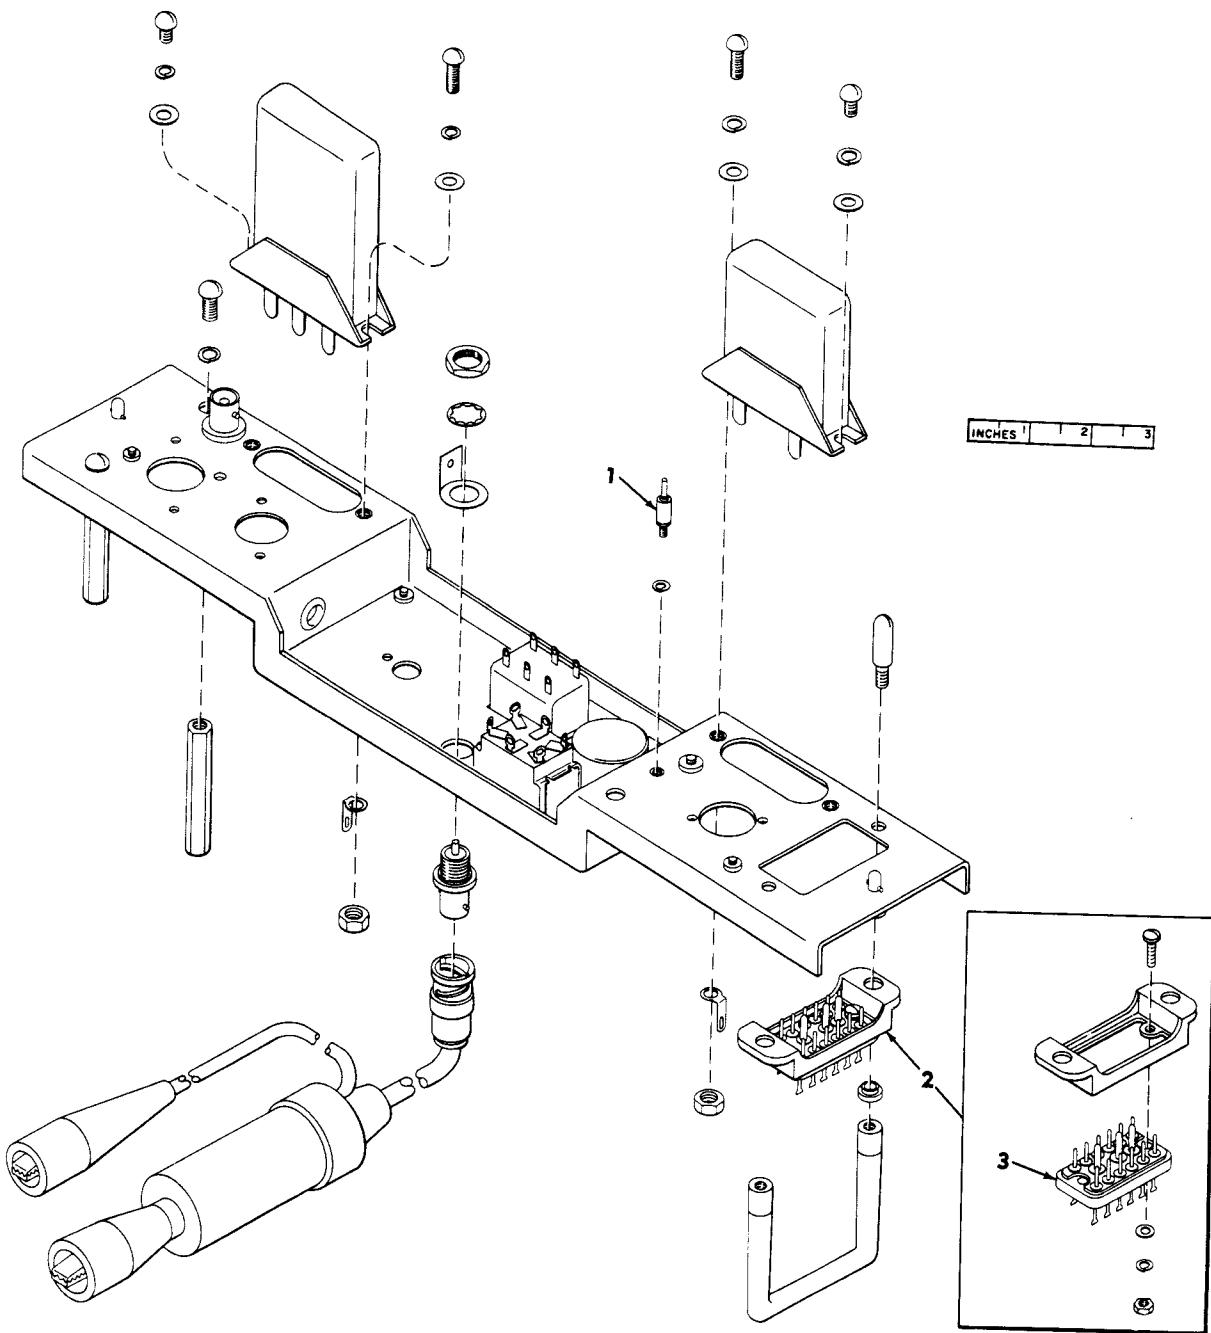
Generator, pulse O-305/M and O-306/M (8007727 and 8007728)—partial exploded view
